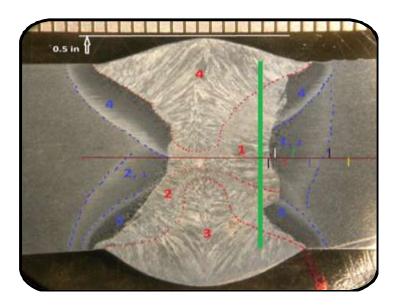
Single pass GMA weld macro cross section, vertical line indicates original plate faying edge; numbers indicate welding pass in weld metal and heat affected zones
